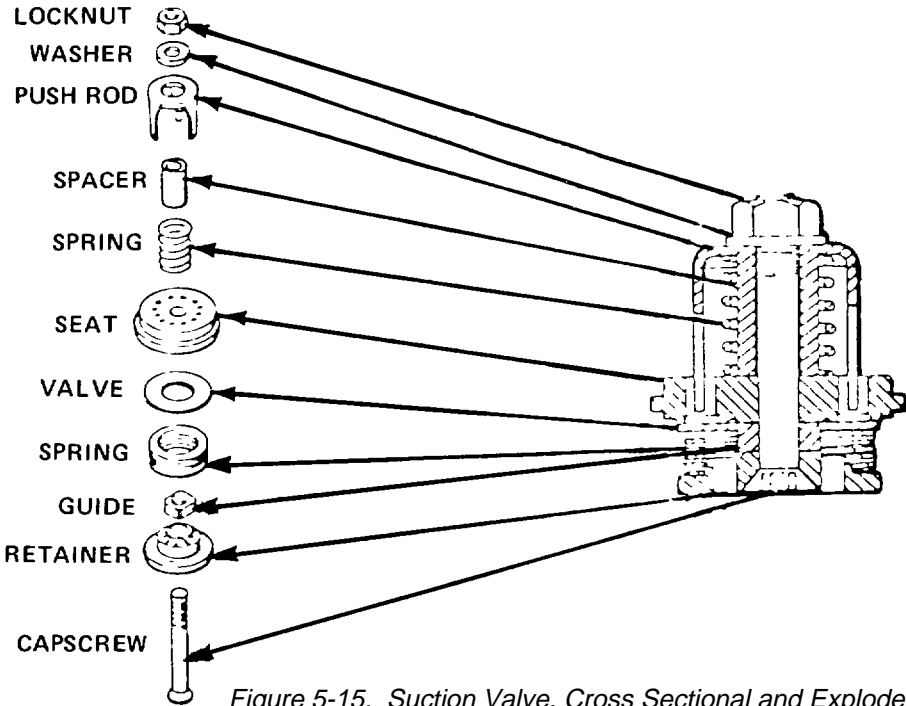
Suction Valve, Cross Sectional and Exploded View
